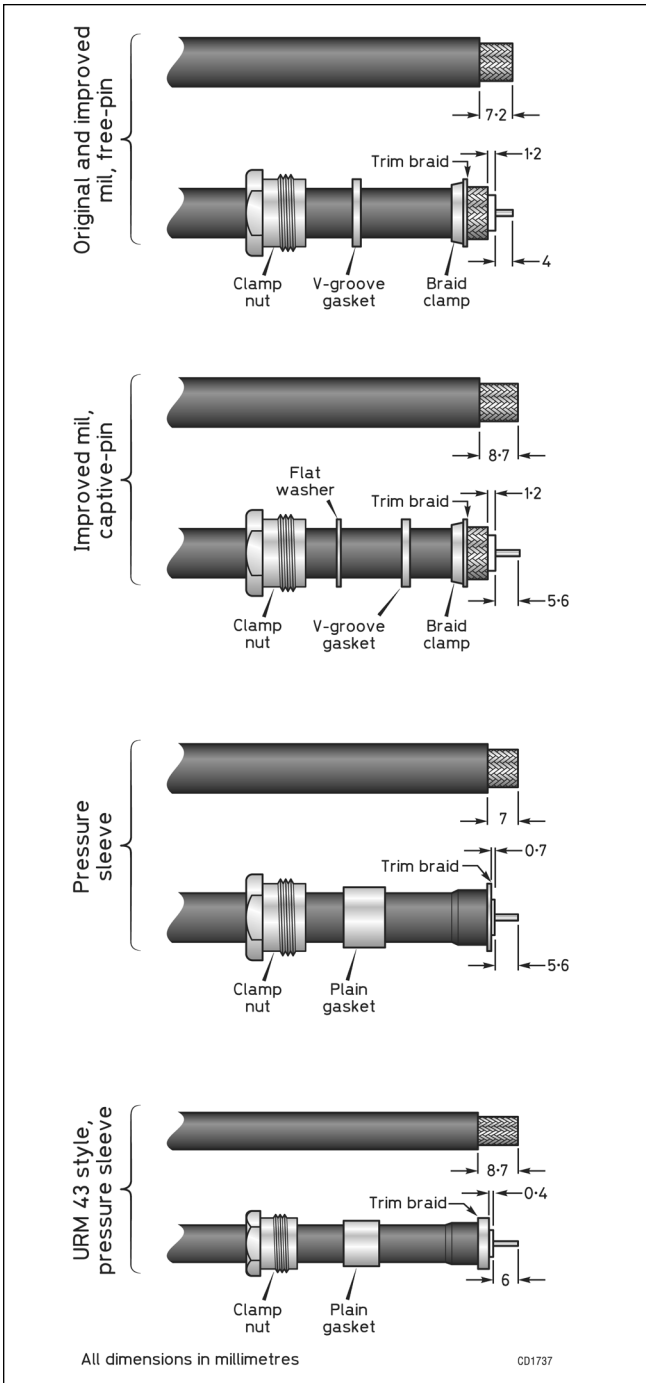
N-type dimensions, plugs, angle plugs and line sockets
